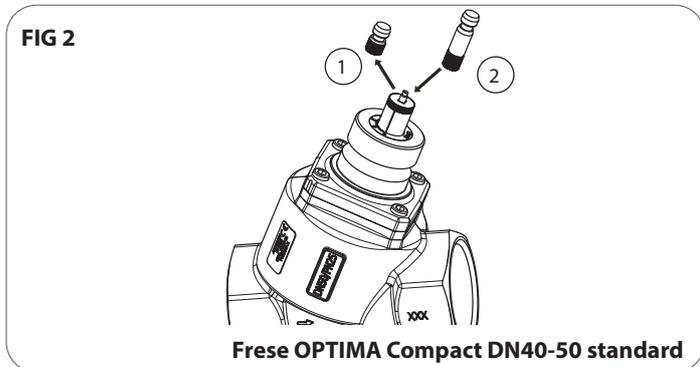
Before mounting the actuator on Frese OPTIMA Compact DN40-DN50 threaded versions, replace the short spindle mounted on the valve with the long spindle delivered with the actuator (Actuators type 58-8922 & 58-8923).
